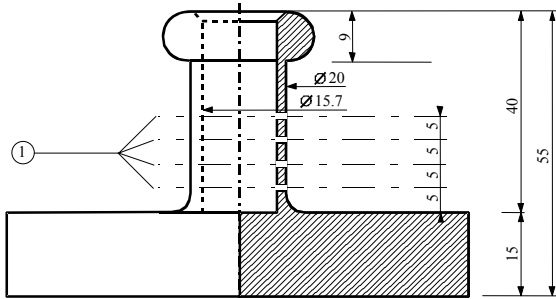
Hollow bronze cylinder, closed at one end; Plan and cut dimensions in mm
